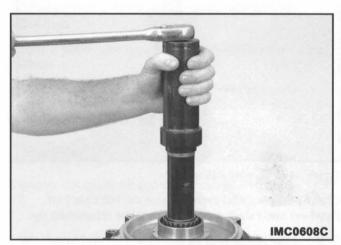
Seating bearing in case with locknut wrench 94660-37A
